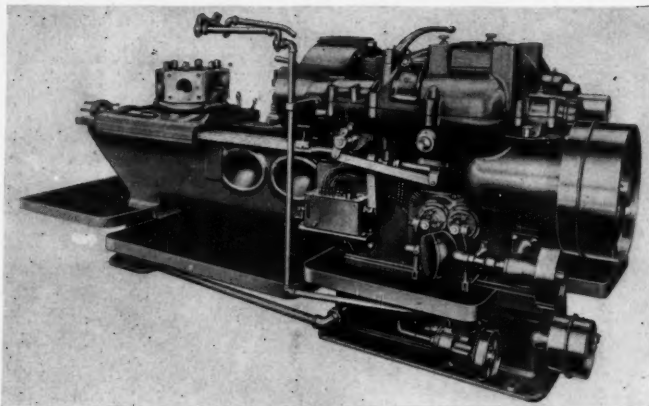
Mechanical force feed lubricator applied to machine tool. Note accessibility of the unit
